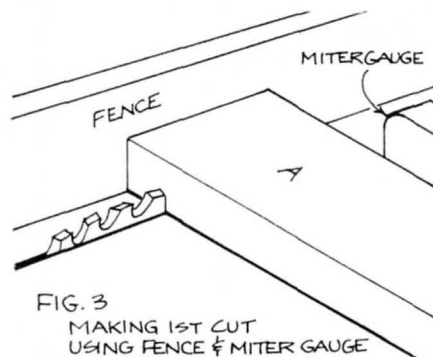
MAKING 1ST CUT USING FENCE & MITER GAUGE
